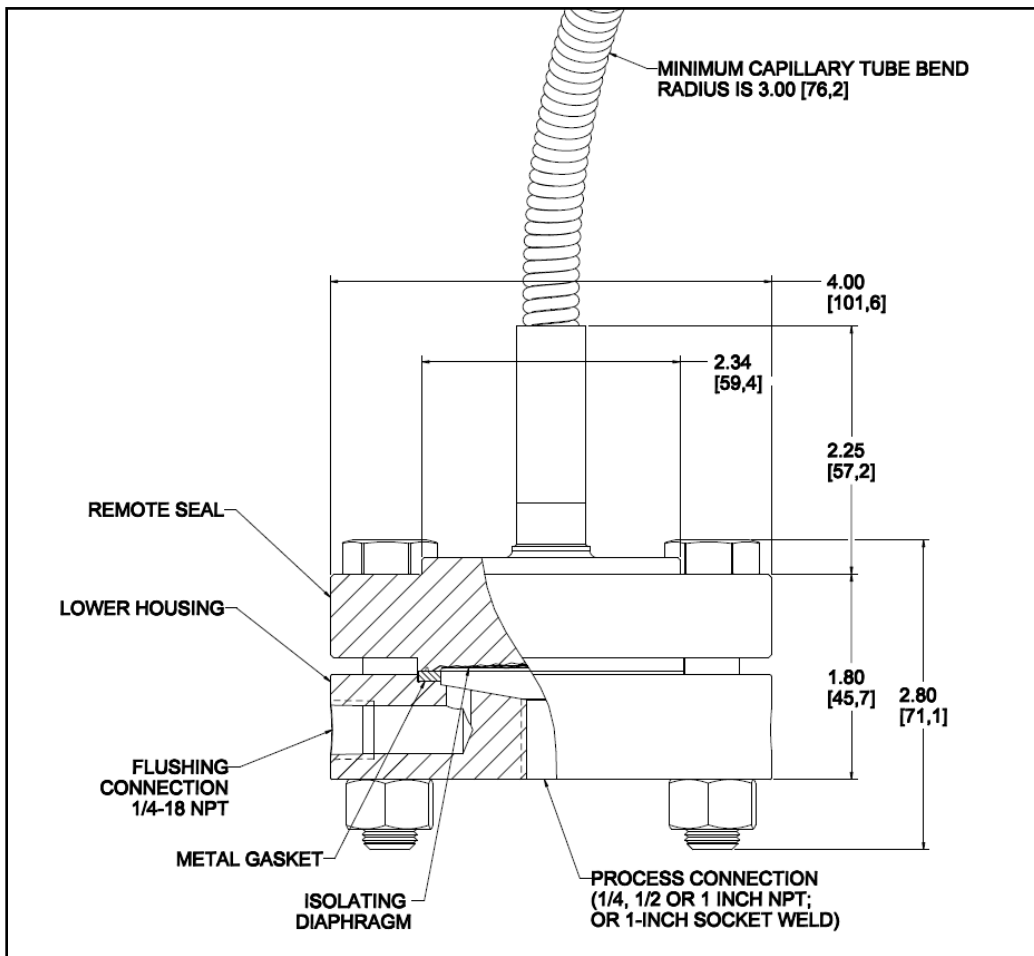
3159 Remote Diaphragm Assembly Dimensions
